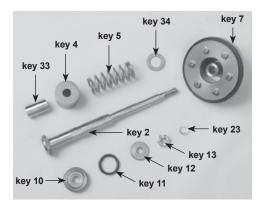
Jet Bleed Internal<sup>™</sup> Valve Parts Kit, Packing Components Not Shown
